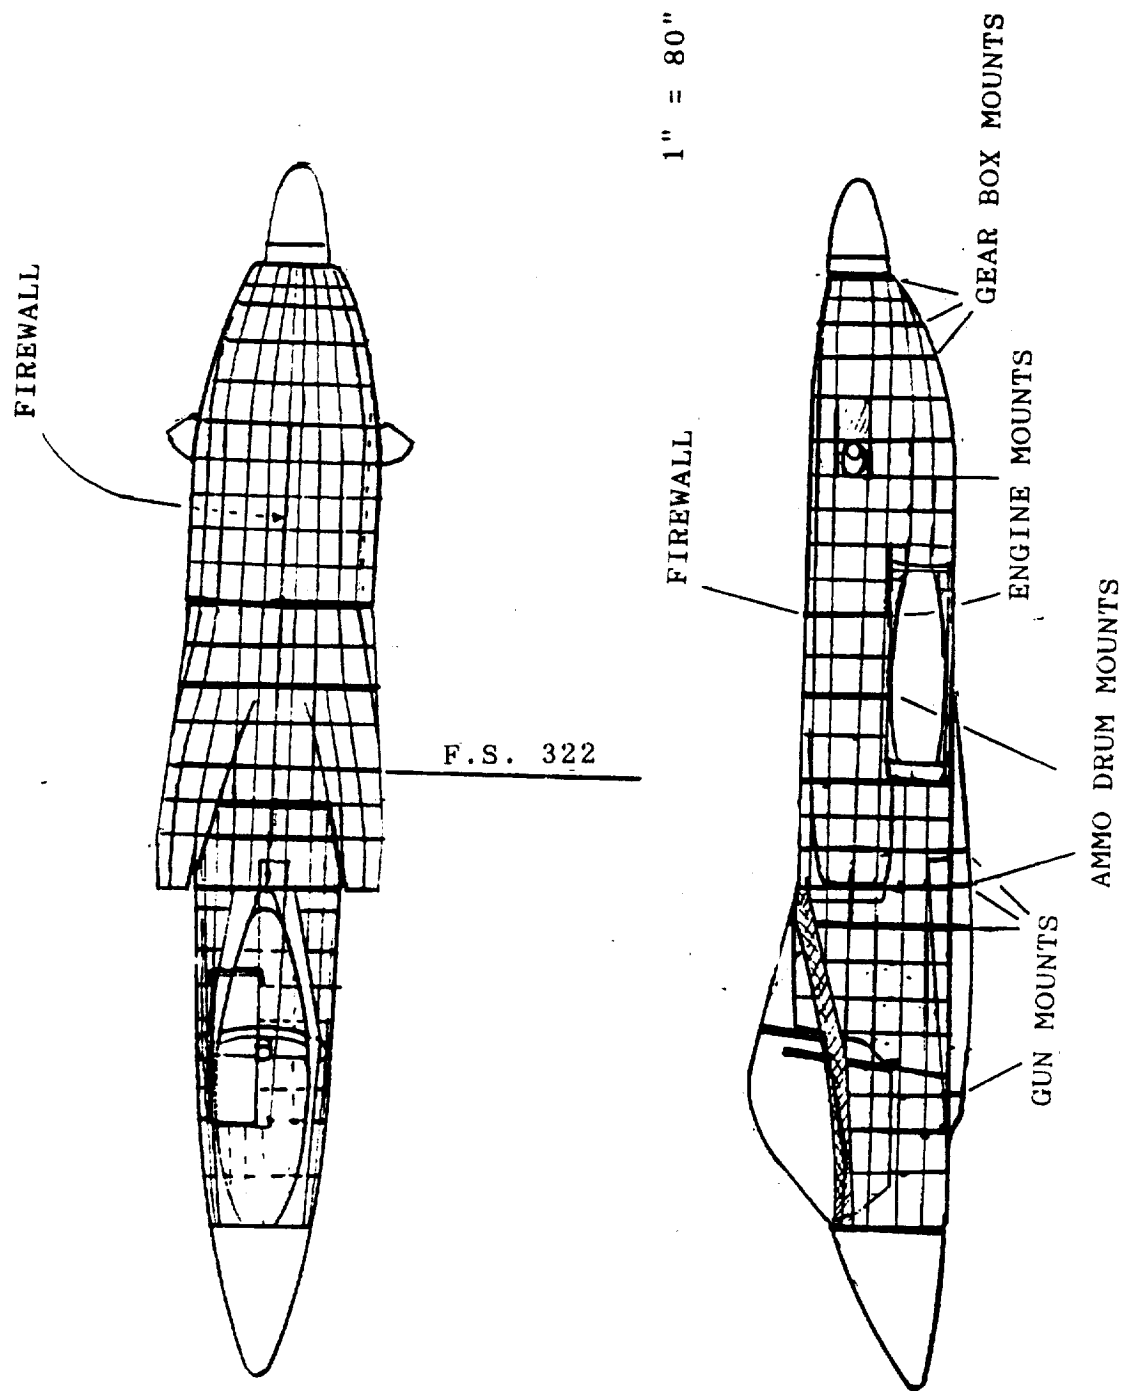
Fuselage structural layout for the Bad aircraft.
